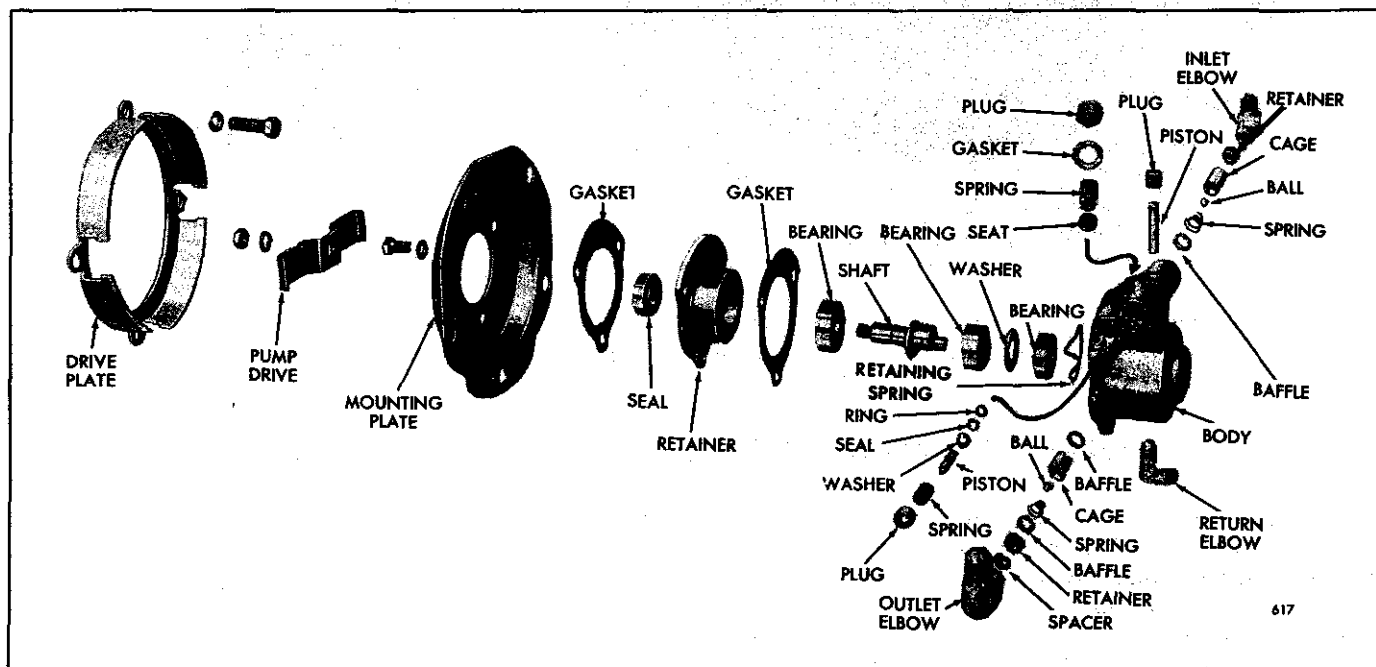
Direct Engine-Driven Charging Pump Details and Relative Location of Parts
